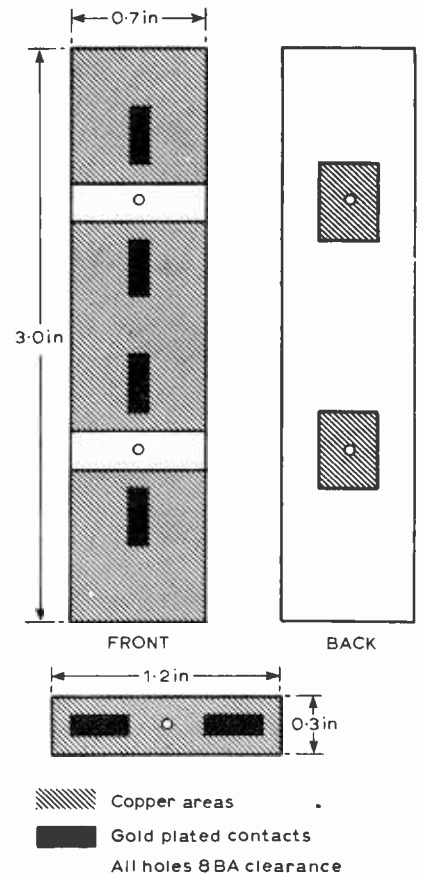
Construction details for the ancillary p.c.bs. Boards 4 and 5 are identical and single sided. Board 3 is double sided, the back areas of copper are used to solder the 8BA nuts in place.
